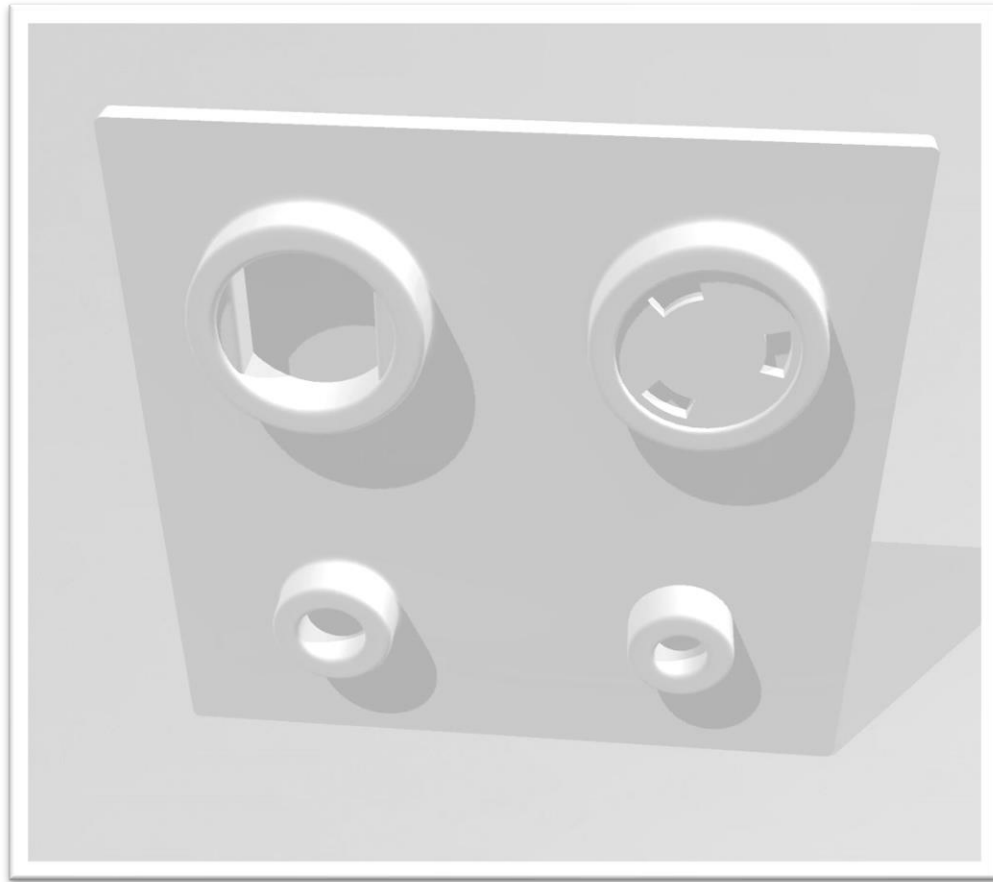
Custom fixture design in STL format for 3D-printing
